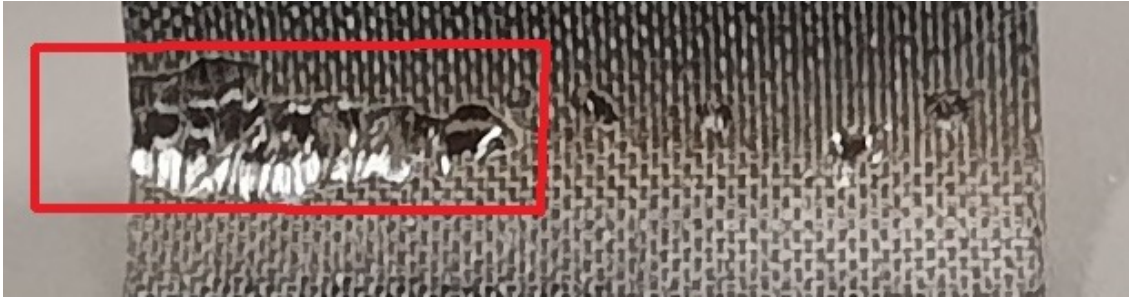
Dry spots in the corner of the BS₁₆ specimen 2 manufactured by the steel tool.
